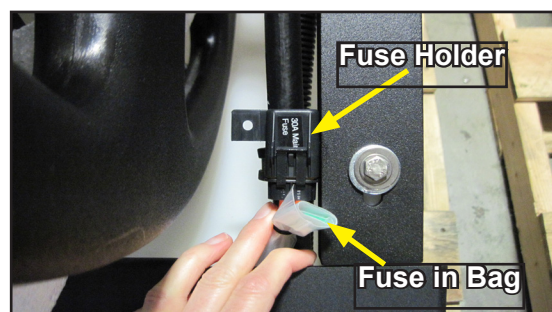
Locate Fuse Holder and 30 Amp Fuse
